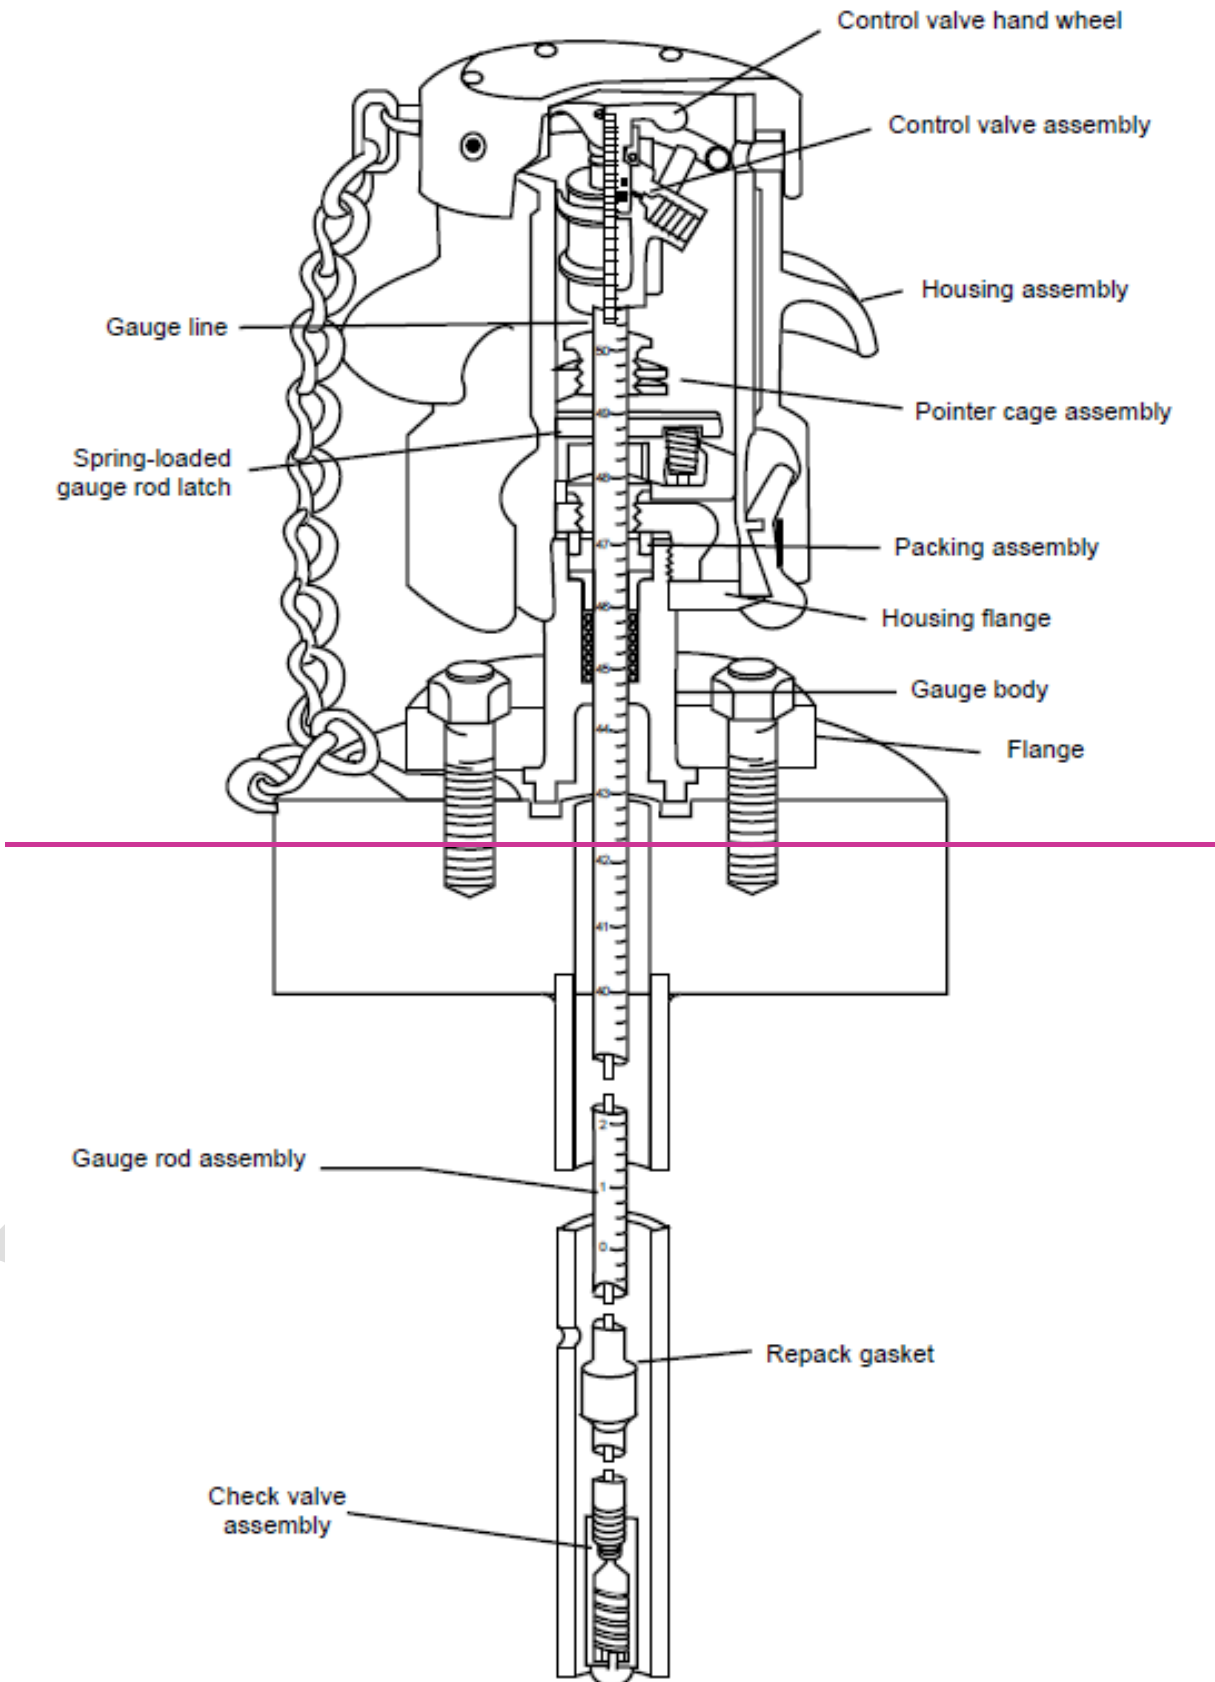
Slip-Tube Gauging Device Assembly With Quick-Release Cover for Compressed Gas Cars
